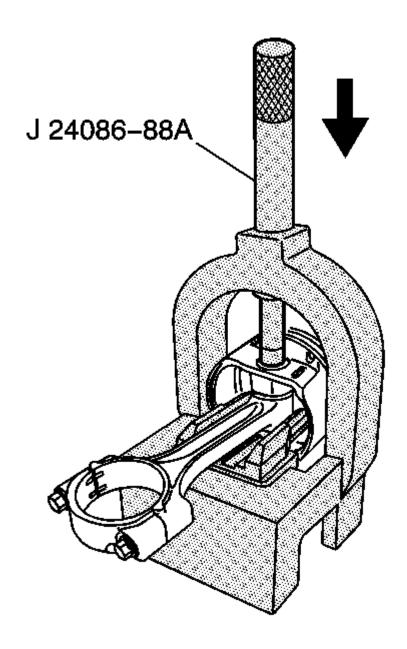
View Of J 24086-88A Courtesy of GENERAL MOTORS CORP.
